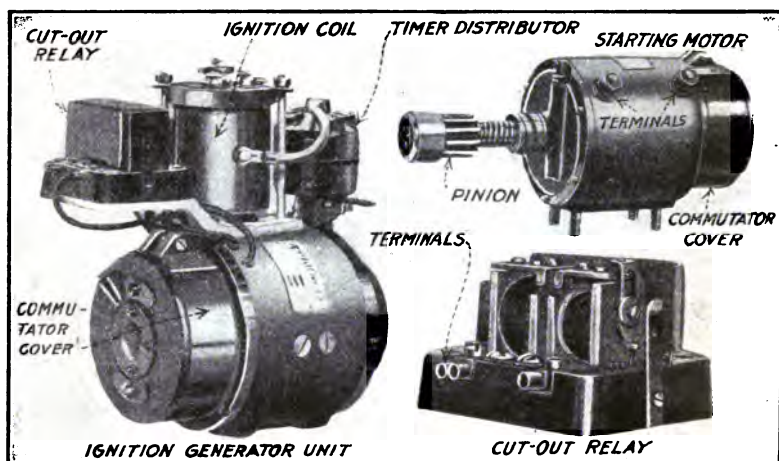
Parts of Remy Two Unit Starting, Lighting and Ignition System.
